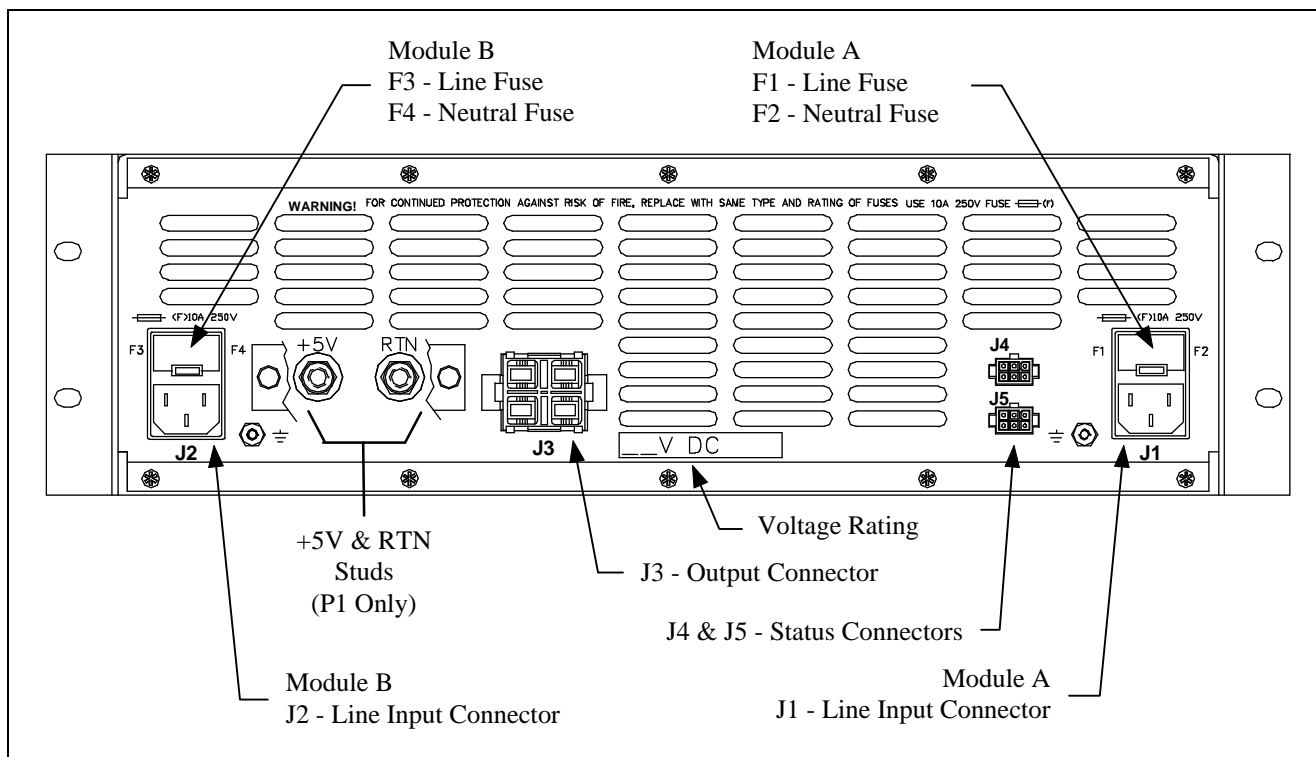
350A1441P1 & P2 Power Module Chassis (Rear View)
